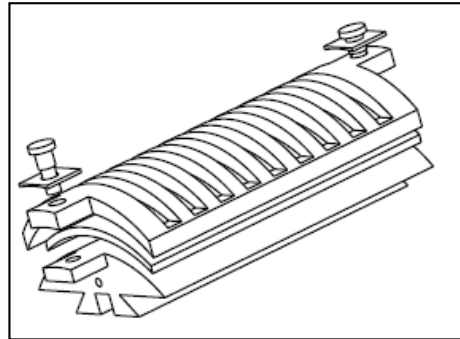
Sample-mounting device designed to hold multilayered samples in place while measuring cut resistance
